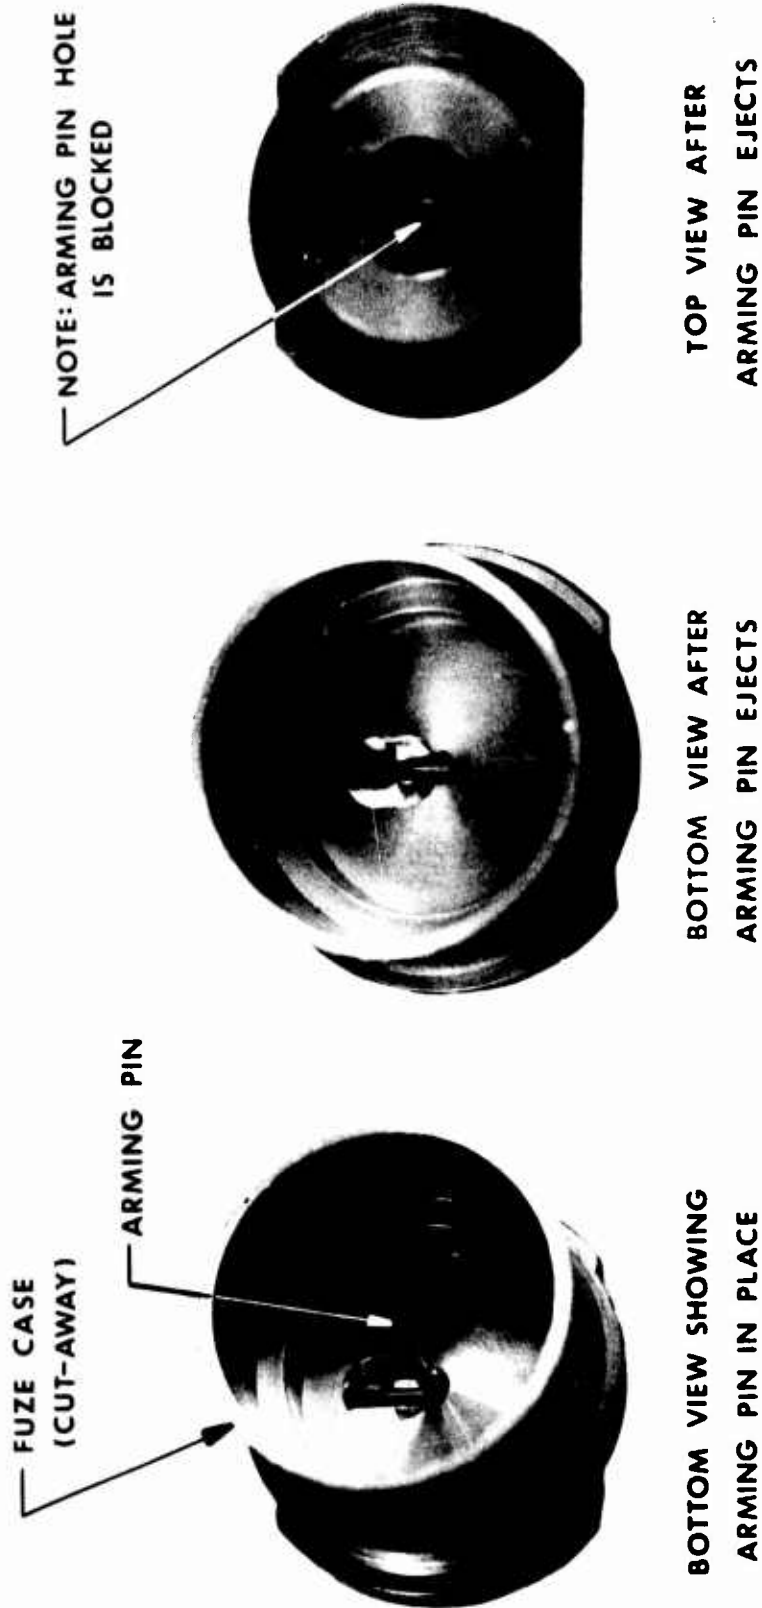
Cutaway View Showing Operation of Arming Pin Anti-Reinsertion Feature.
